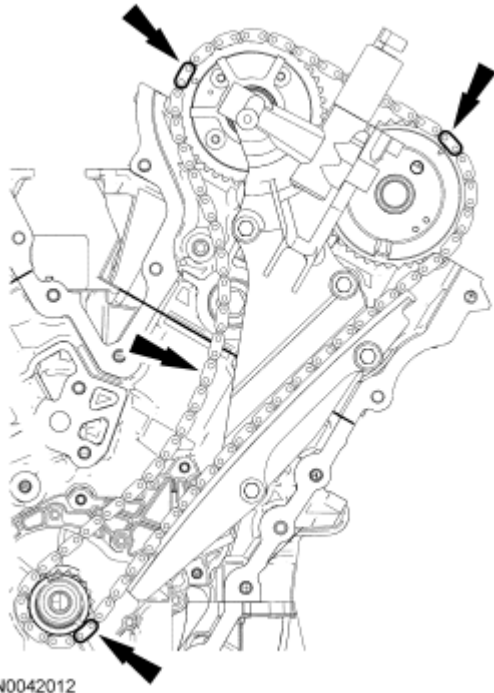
Aligning Marks On Timing Chain With Marks On Camshaft And Crankshaft Sprockets
